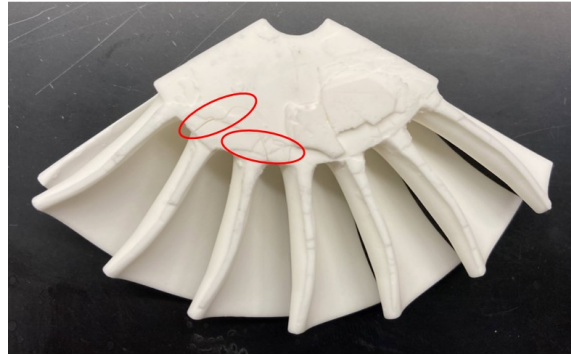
Radial cracking in the hub of the oval turbine rotor.
